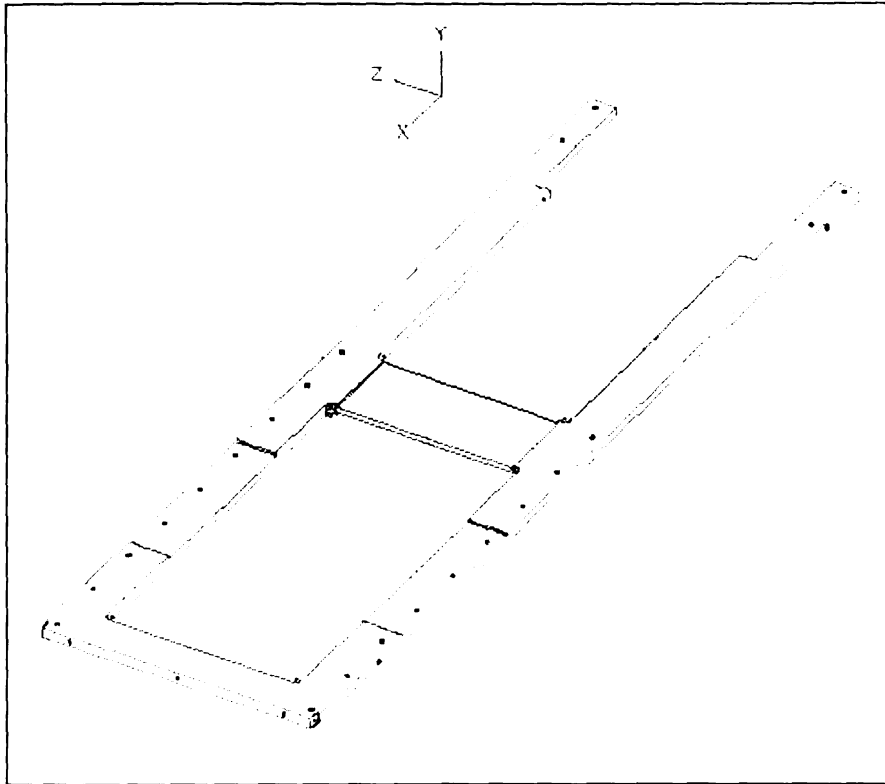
Skeleton used to support the model and to house cables and tubes
